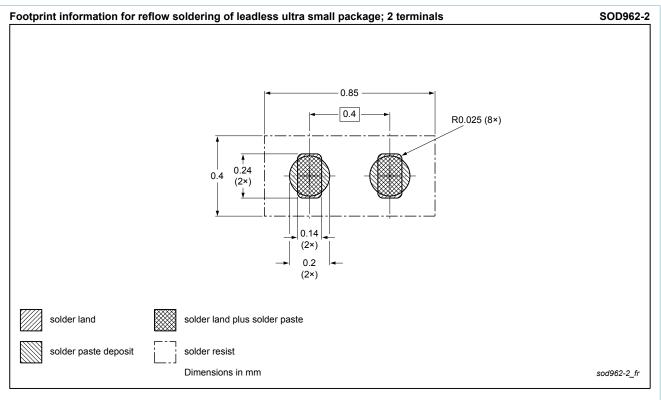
Reflow soldering footprint for DSN0603-2 (SOD962-2)
